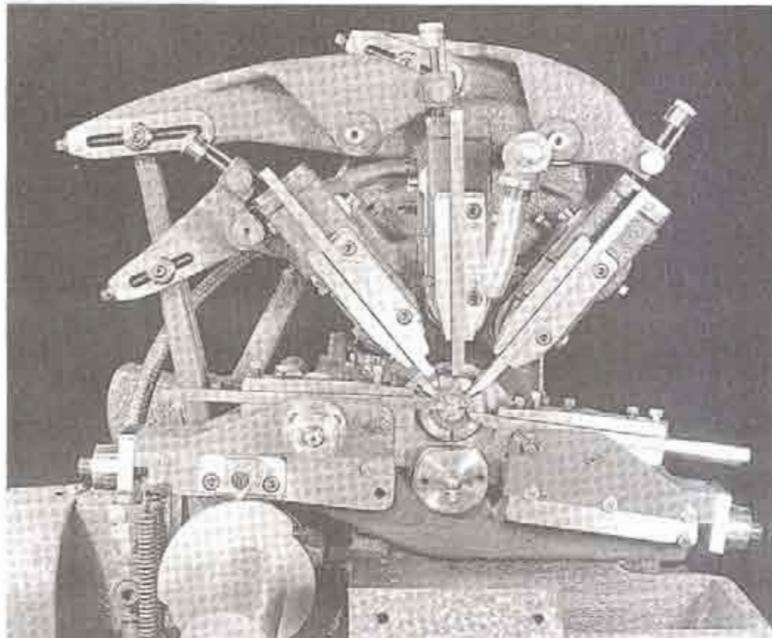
Close-up view of a Swiss-type screw machine, showing the tooling and radial tool sides, actuated by rocker arms controlled by a disk cam, shown in lower left. (Courtesy of George Gorton Machine Corporation.)
